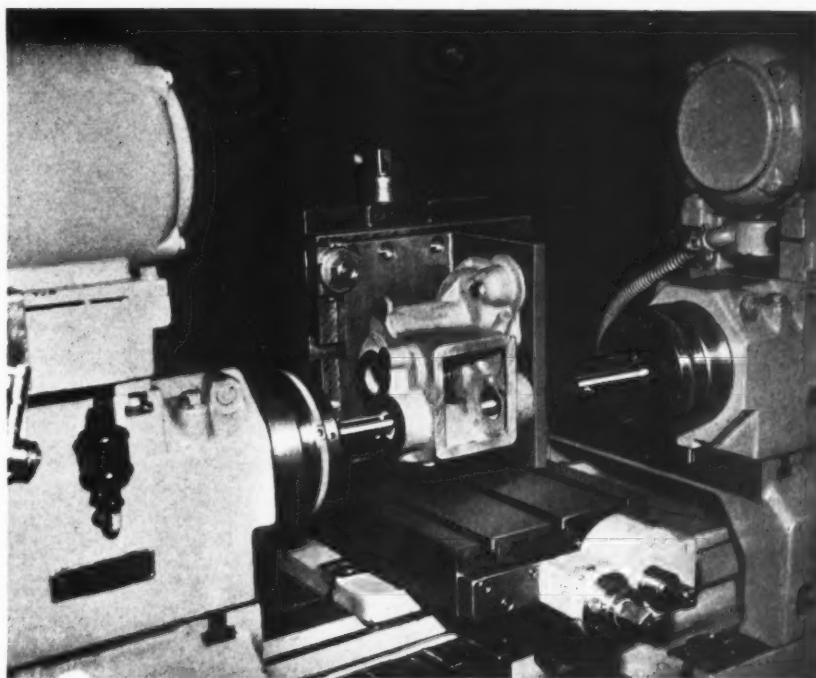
Precision Boring Machine Employed for the Accurate Finishing in Line of Two Sets of Bores in Control Transmission Cases
